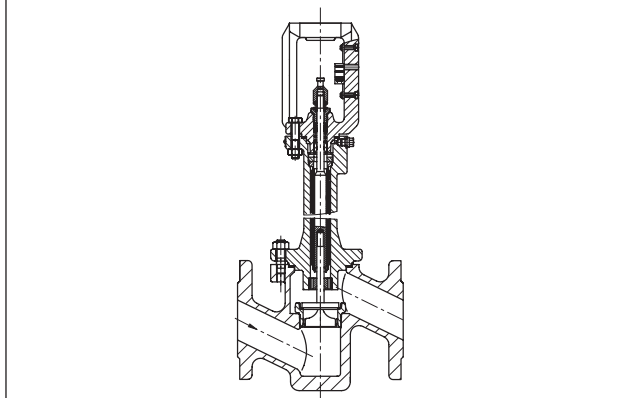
Type 3241 Valve, forged steel version, DN 15 to 80, with bellows seal
